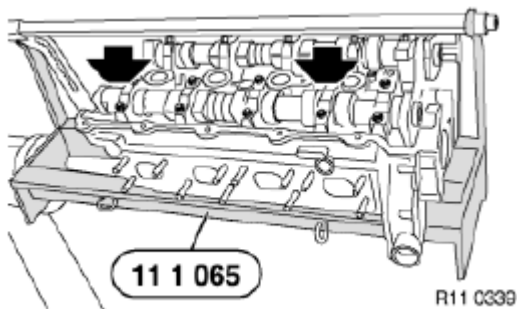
Identifying Special Tools For Cylinder-Head
